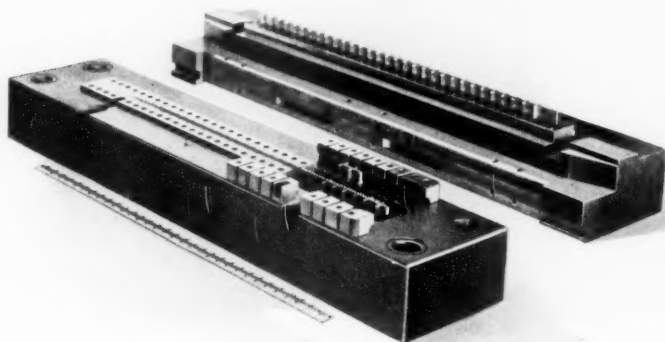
Compound punch and die for blanking and perforating multiple bank terminal strip.
